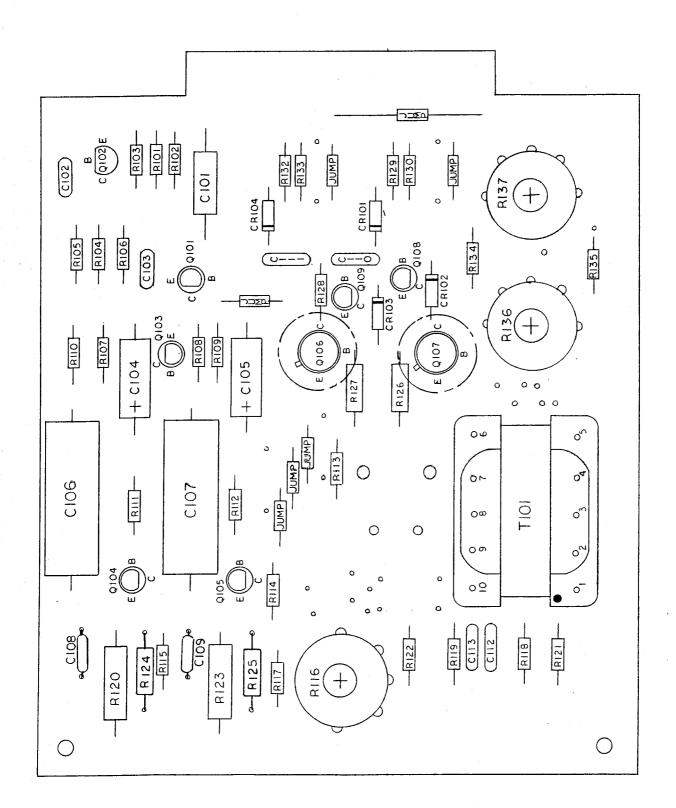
Component Locations (3C661-4), Power Driver PCB Assembly
